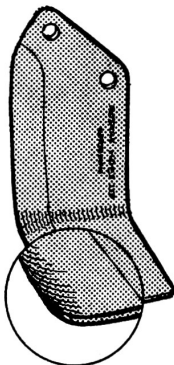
Enlarged view of blade with cutting edge turned inwards.
